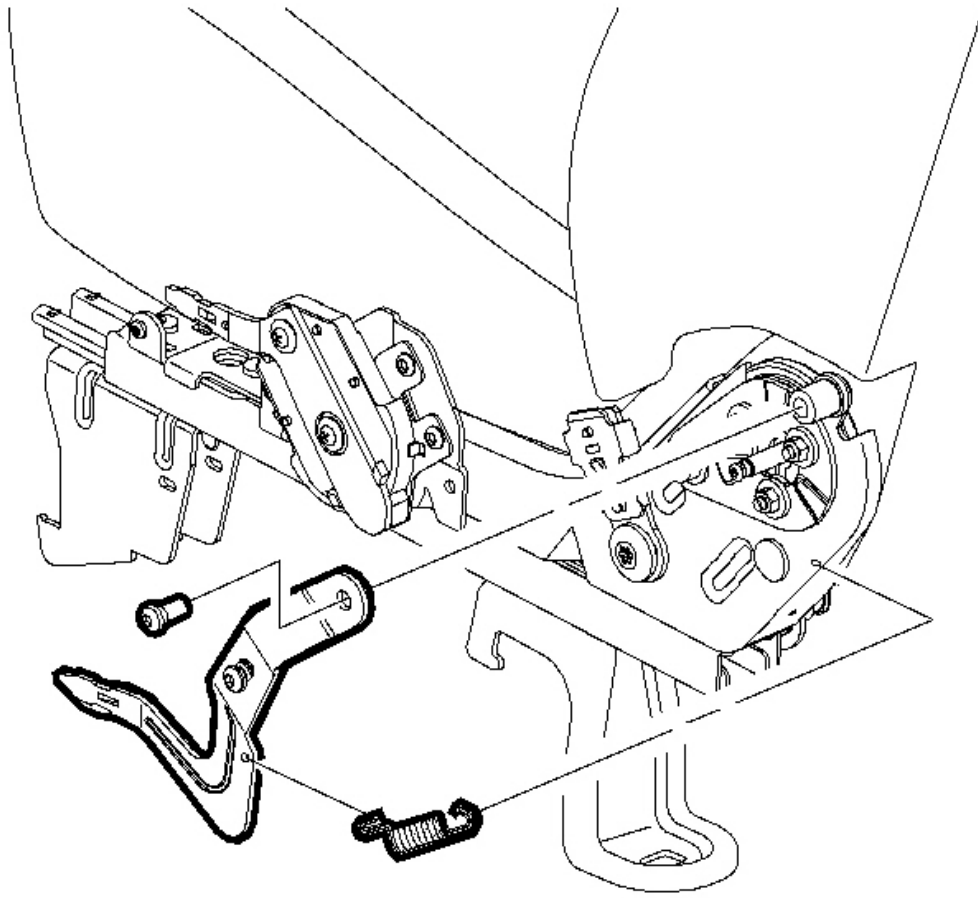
Removing/Installing Recliner Handle Bolt & Spring
